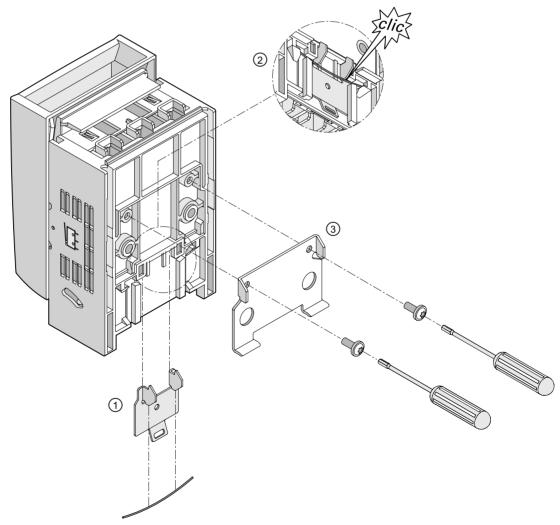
Mounting the fuse switch disconnector, size 000 onto a standard rail (1)
